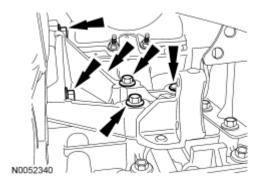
Locating Power Transfer Unit (PTU) Support Bracket & Bolts Courtesy of FORD MOTOR CO.
